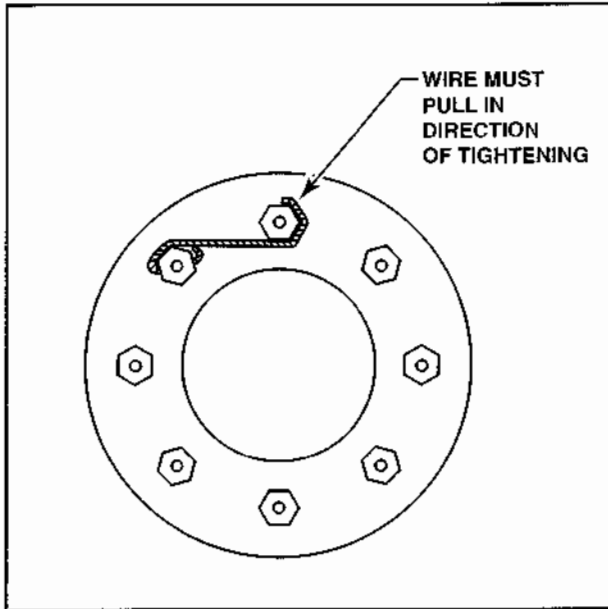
On propellers secured to a flanged hub with bolts, pairs of bolt heads are tied together with safety wire to keep the bolts from loosening.
